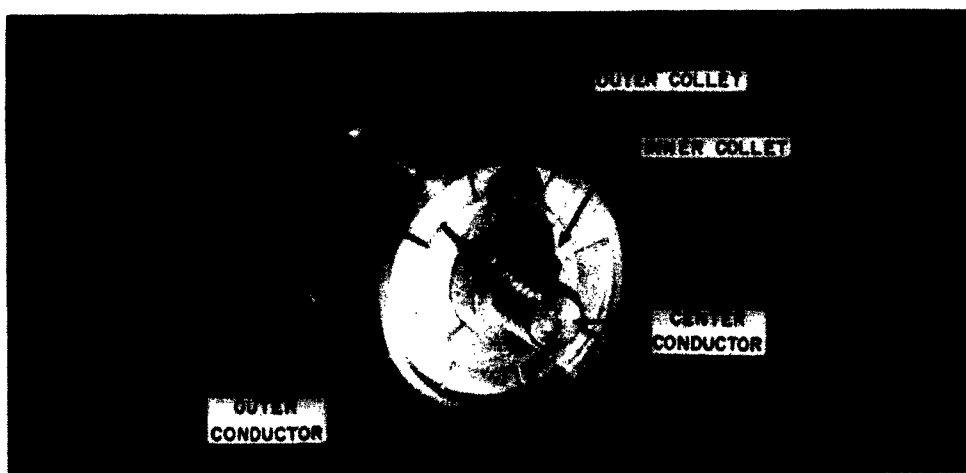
CLOSE-UP OF COLLETS FOR ADJUSTABLE SHORT
